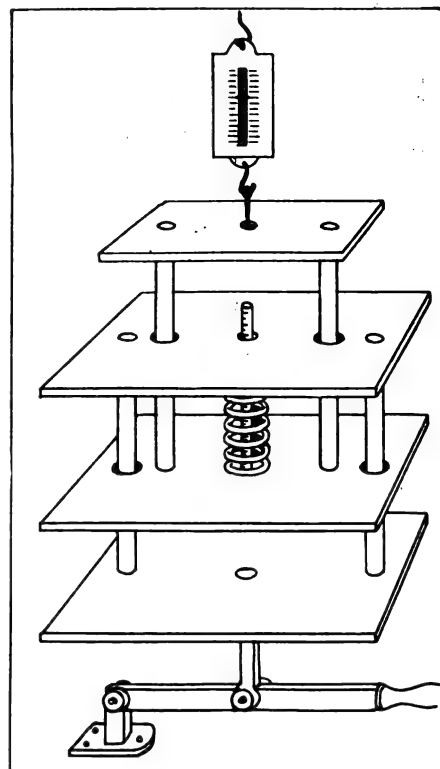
A Device for Quickly Determining Tension of Valve Springs.
